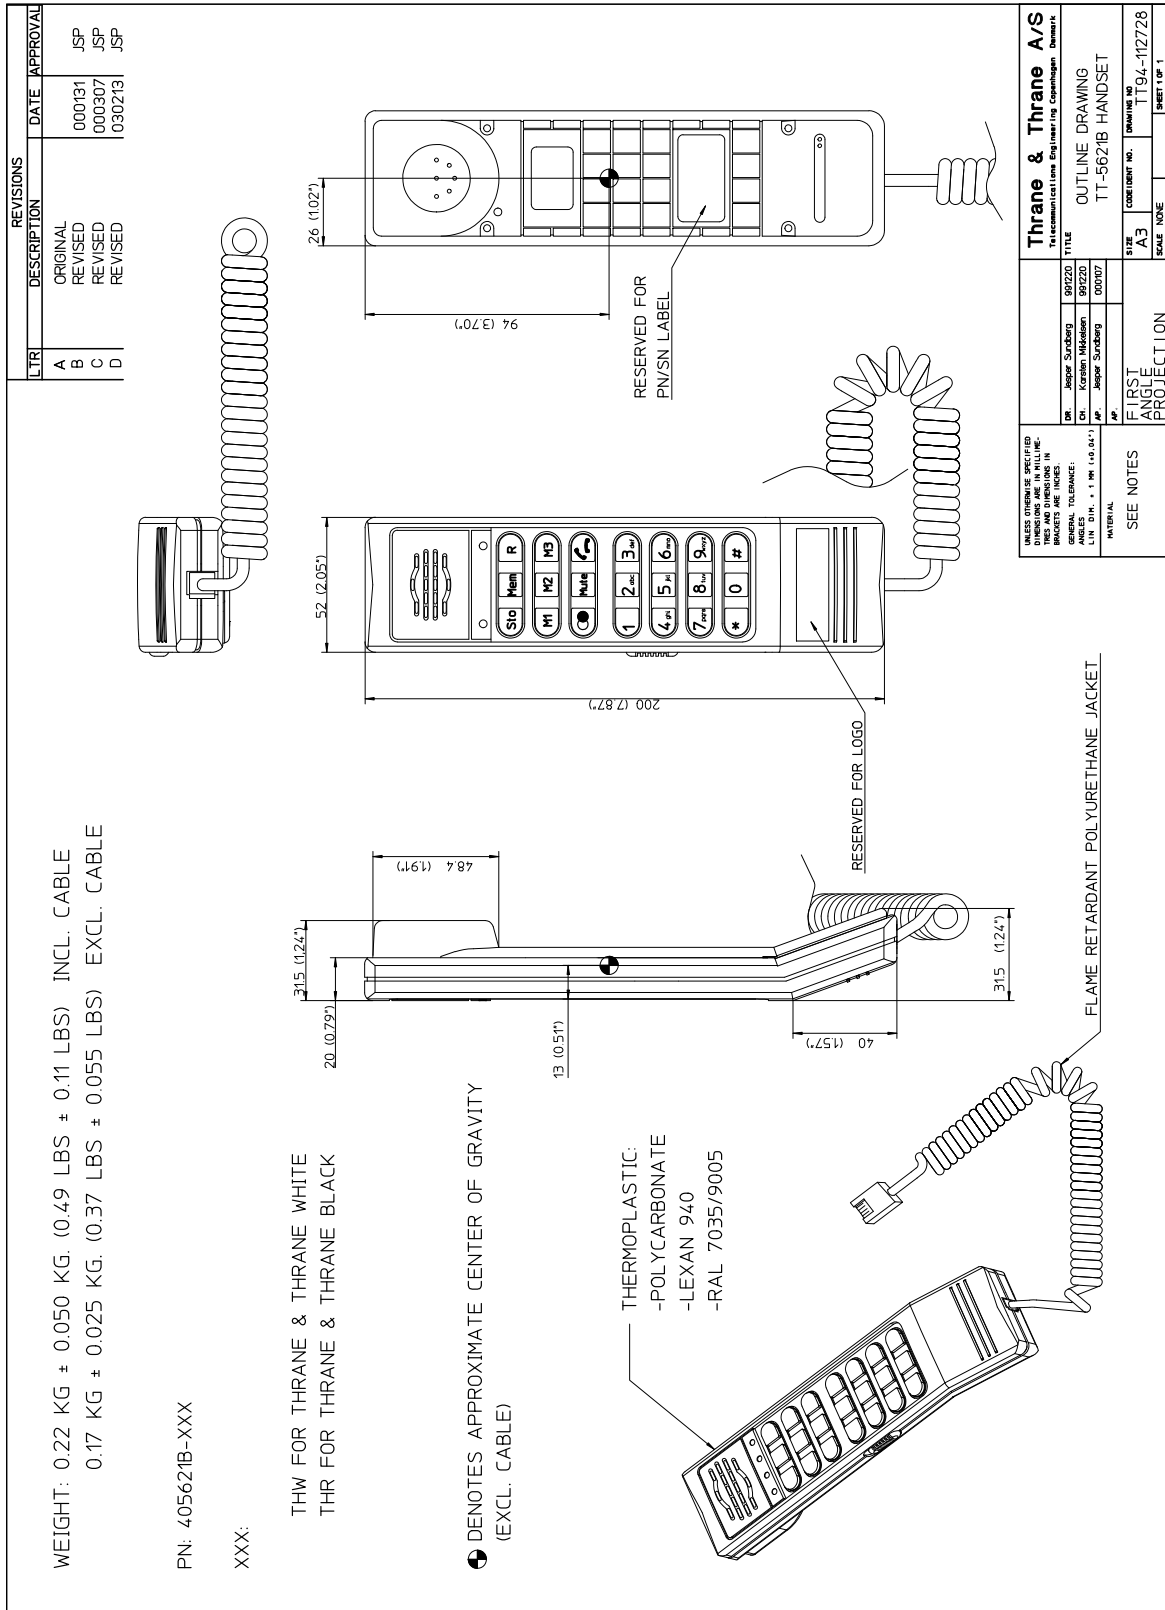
Outline drawing: TT-5621B 2-Wire Handset
